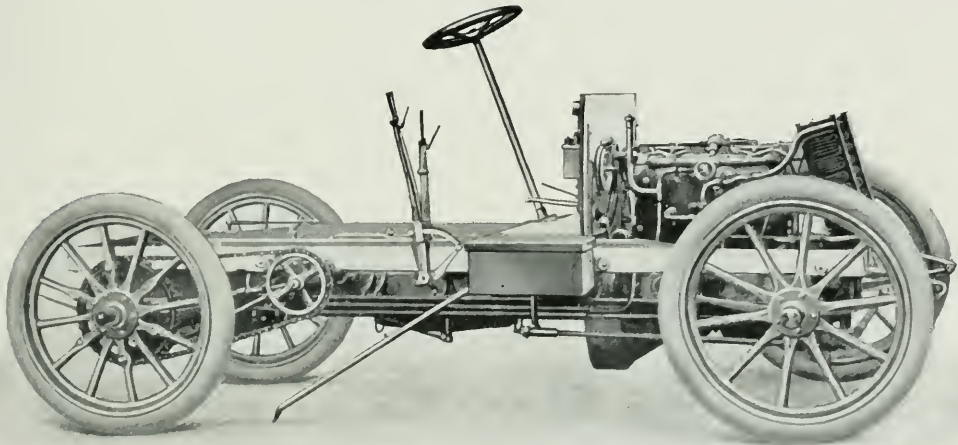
ELEVATION OF BRUSH PETROL CAR WITH "BODY" REMOVED.
